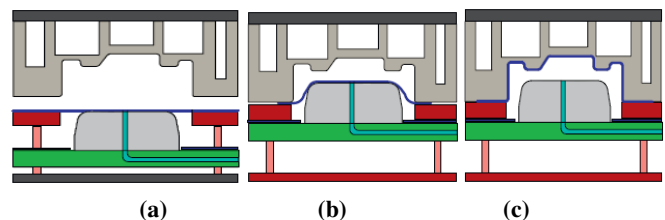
Schematic of Hot draw mechanical pre-forming SPF process (a) the sheet is first loaded into the die set (b) a drawing stage pre-forms the sheet (c) a gas forming stage completes the forming operation [12]
